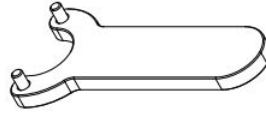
Adjustment tool for fine-focus adjust of diode tube position.
